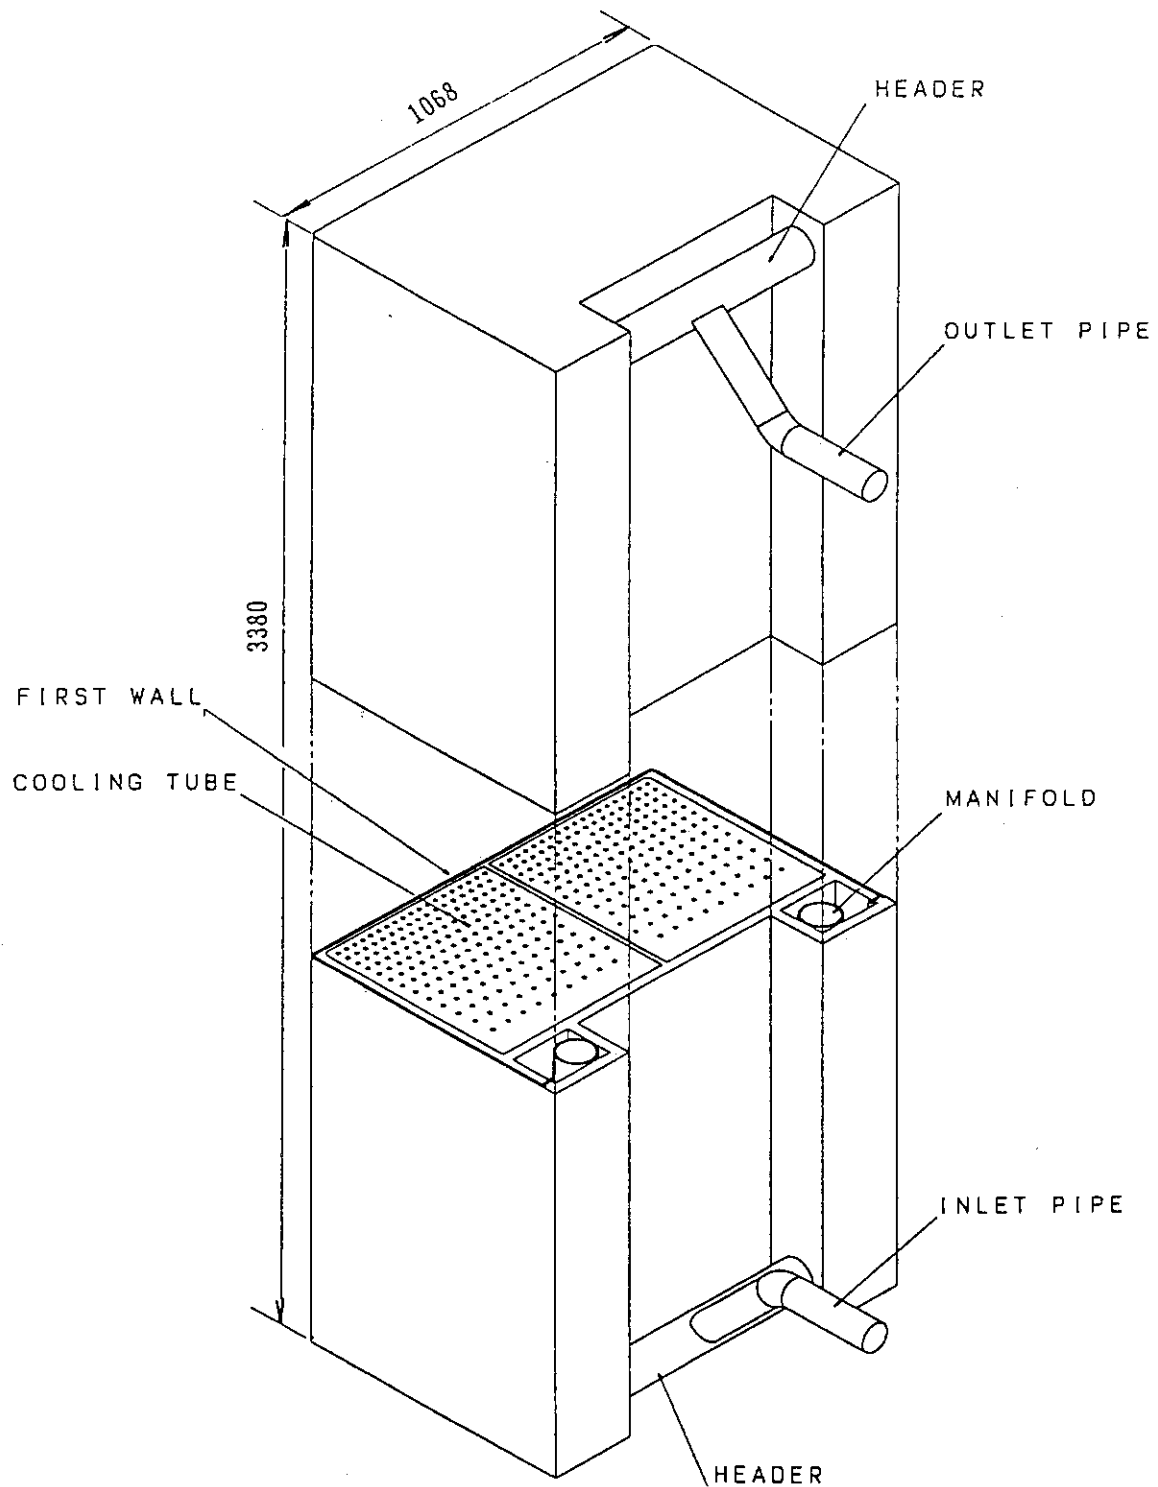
Schematic view of water-cooled test module for ITER testing (breeder/multiplier mixture type)
